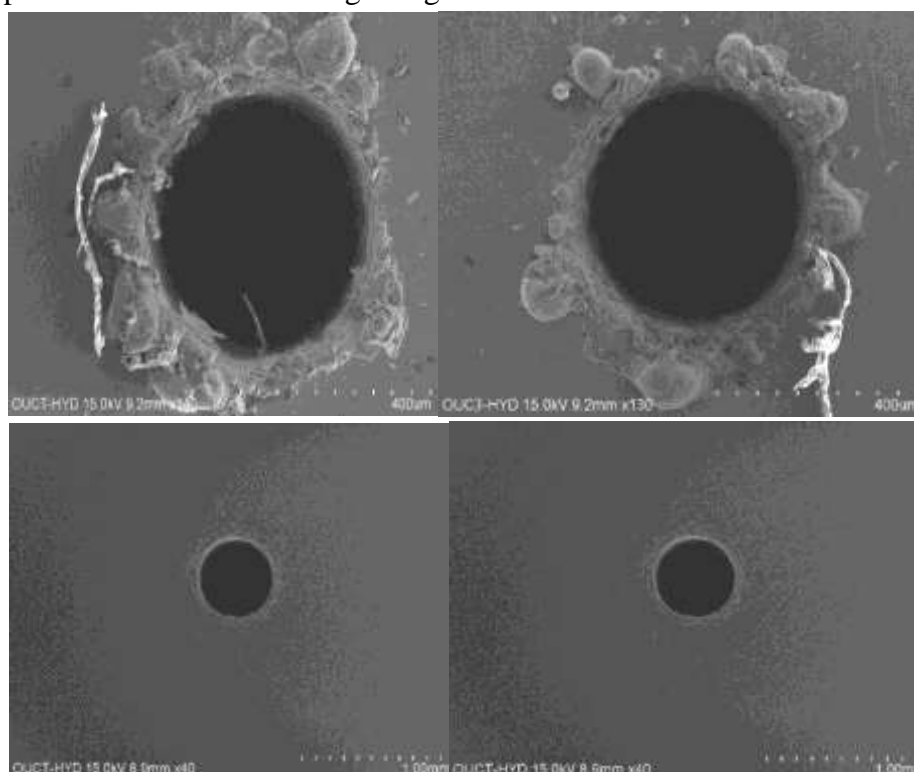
Machined hole entry & hole exit of Trail 20 Experiment of meso hole on EN_31 Steel
